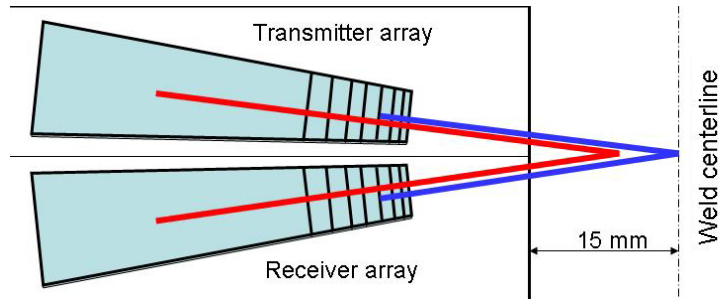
New dual phased array probe design for austenitic weld inspection
